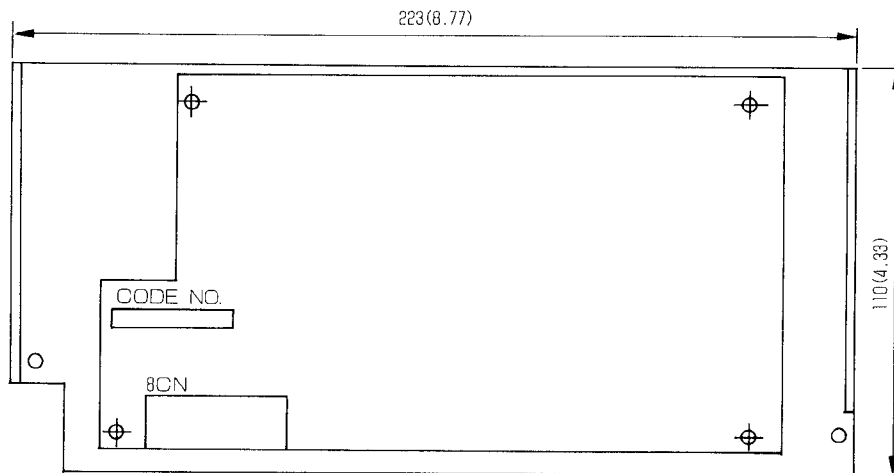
Dimensions of Orientation Card in mm (inches)
